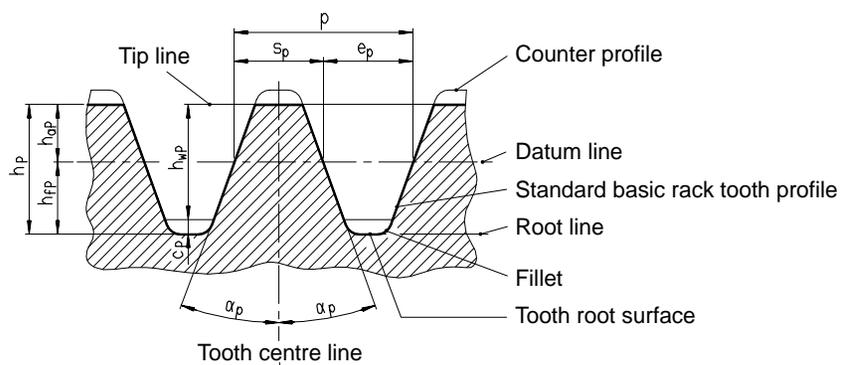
Basic rack tooth profiles for involute teeth of cylindrical gears (acc. to DIN 867)
